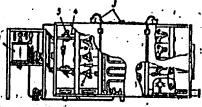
1 - circulating arrangement; 2 - glue-spreading mechanism; 3 - mechanism for automatic opening and closing of the bath lids; 4 - conveyer chain; 5 - lock
